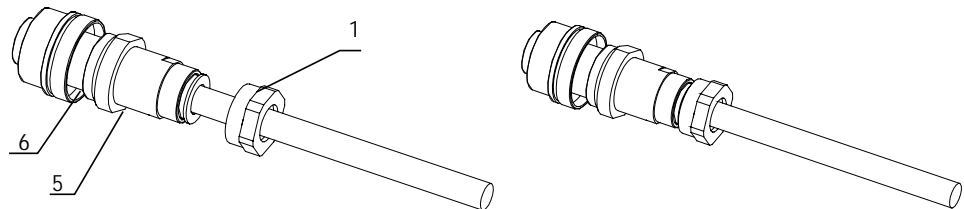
Assembling a Power Cable Connector (step 6)
